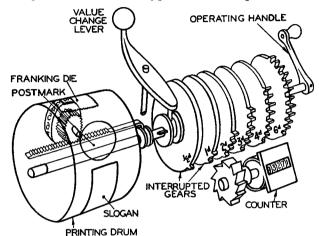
Value Selection and Counter Drive of Single Counter, Non-locking Machine.
